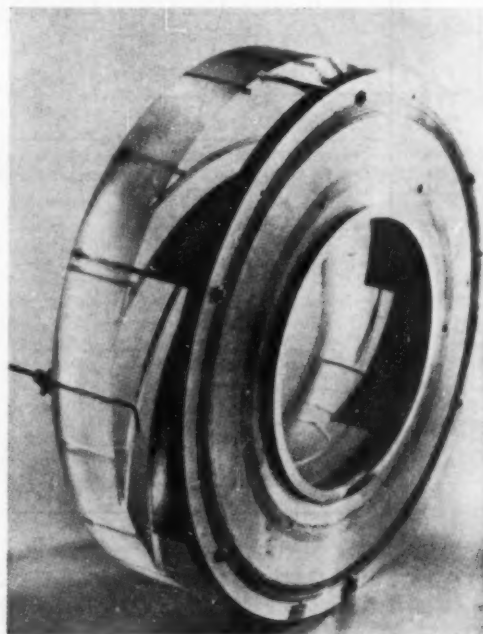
VIEW OF ASSEMBLED TWO-DIMENSIONAL IMPELLER
